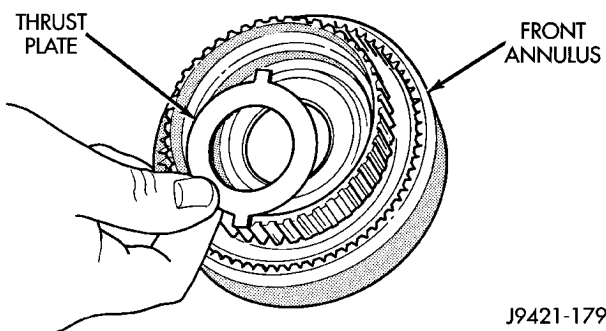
Positioning Thrust Plate On Front Annulus Support
